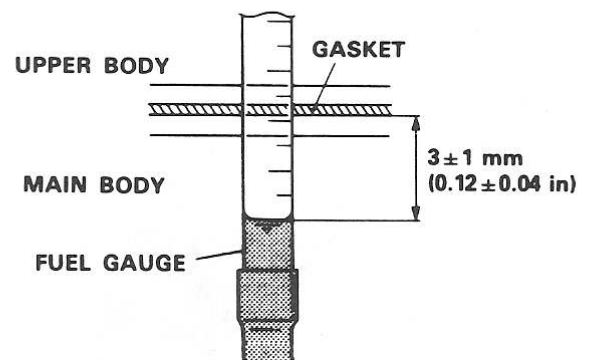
On YT 60 models, the fuel level in the clear fuel hose must be the specified distance below the gasket surface of the float chamber (Sec 6)
